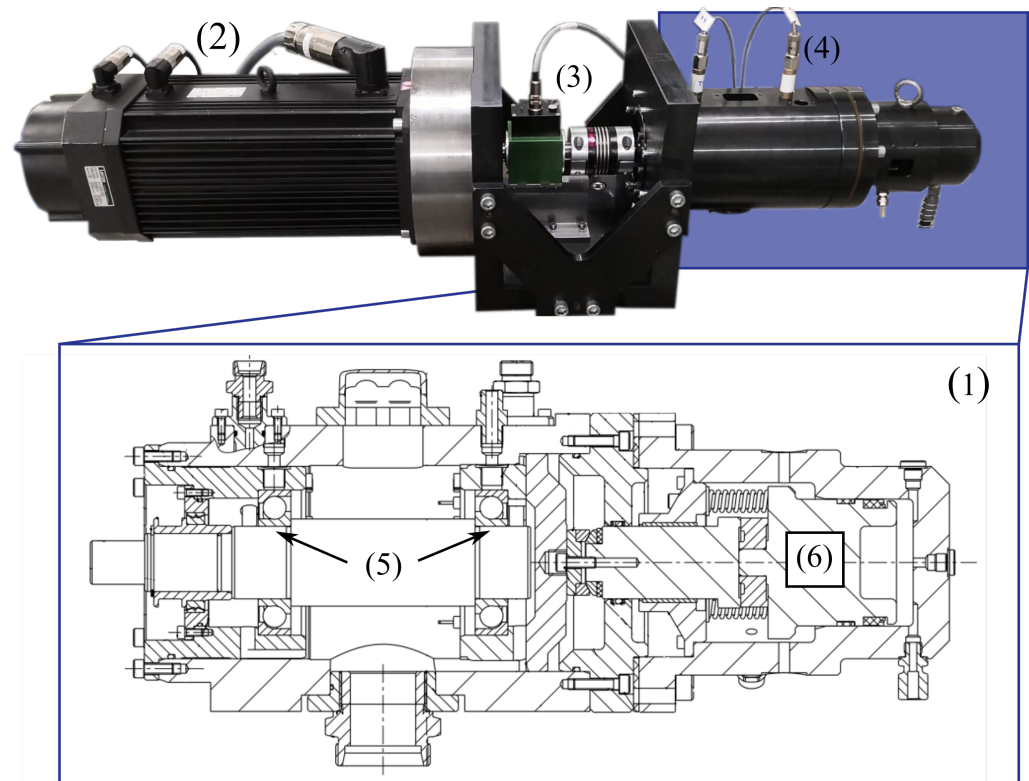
The upper part shows a picture of the complete test setup including the servo motor (2) of the torque shaft (3) and the test unit (4). The lower part (1) shows a drawing of the test unit that contains the two angular contact ball bearings of type 7208 (5) and the load application system (6).
